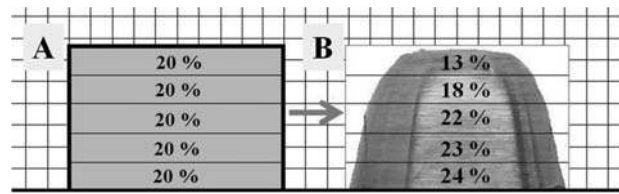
Non-uniform tool wear model: (a) original probe; (b) probe after 24 inches of weld
